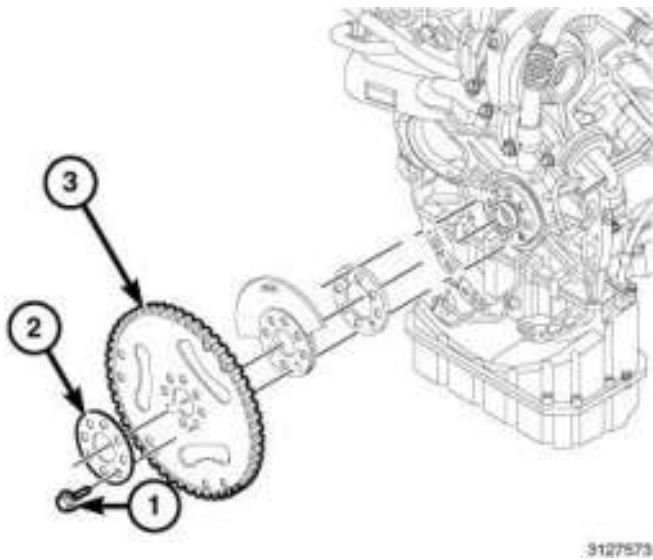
Flex Plate, Counter Weight, Tone Wheel & Bolts
